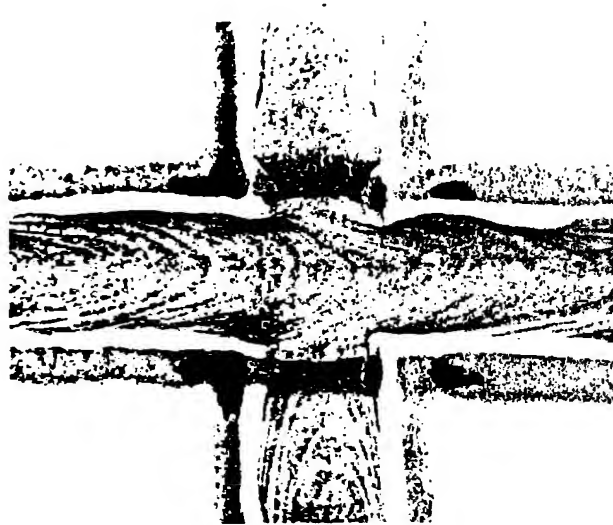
Carbide precipitation clearly shown paralleling beads of type 308 weld metal on type 304 stainless plate.
